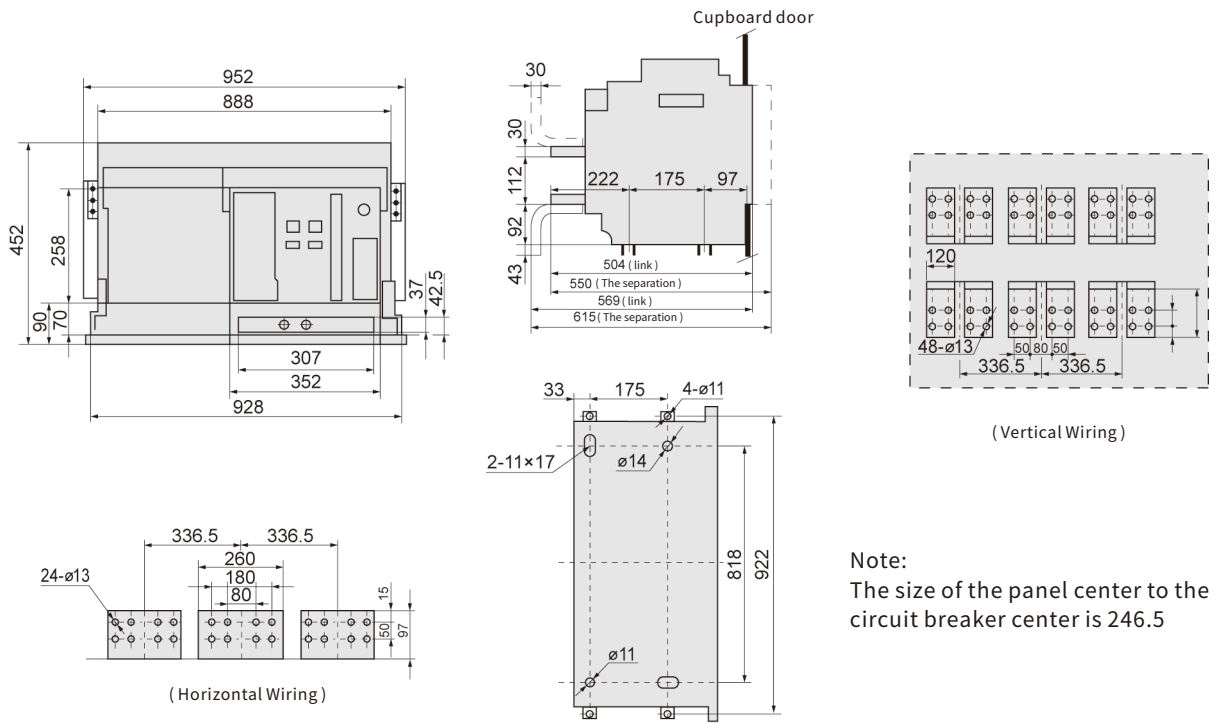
Outline and installation dimensions of drawout type circuit breaker (EKA1-4000/4)
